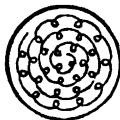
BUR-NISHING THE SILVER SURFACE.
